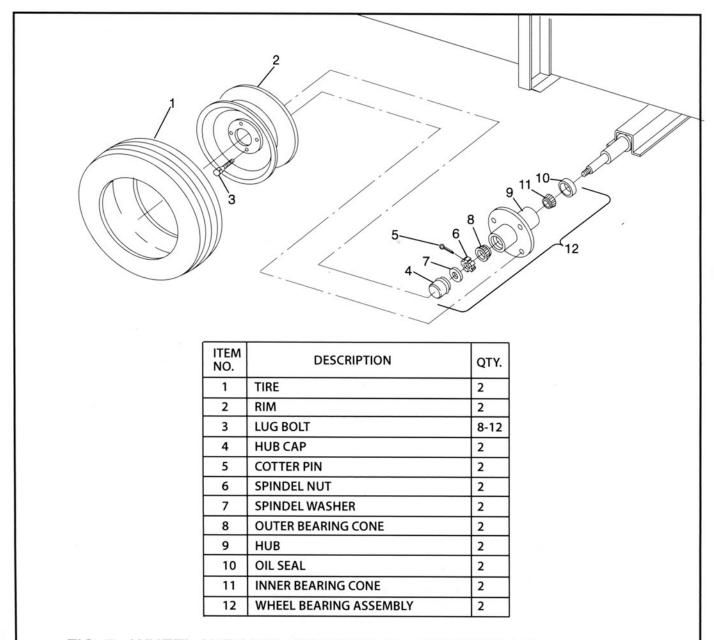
WHEEL AND HUB ASSEMBLY ALL PTO MODELS
